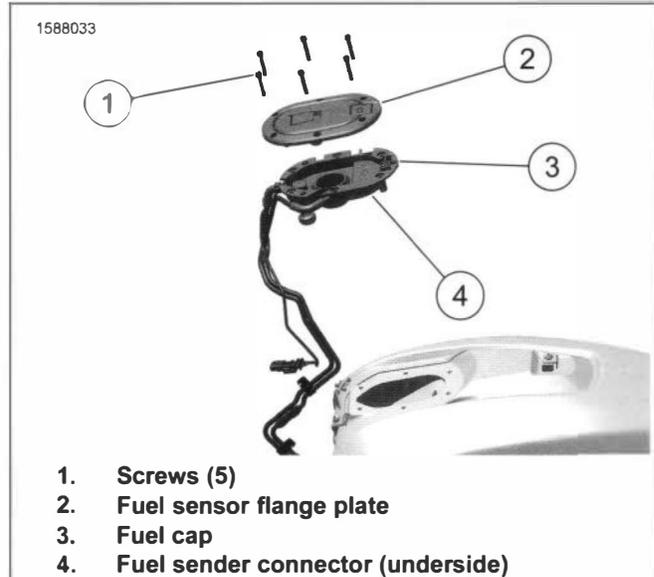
Fuel Inlet and Sensor Flange Plate
